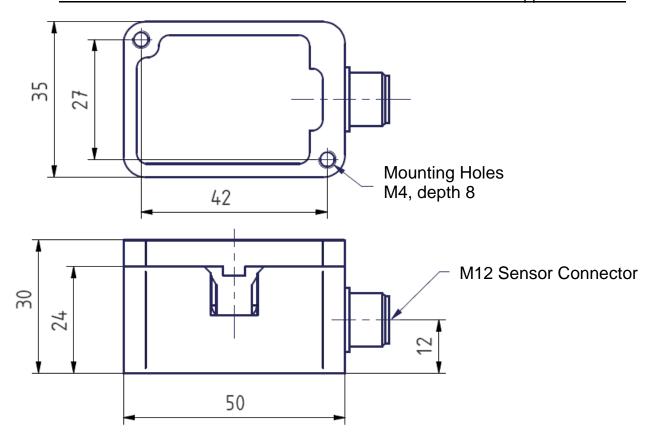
Drawing of sensor model S Note: The drawings do not conform to real dimensions
